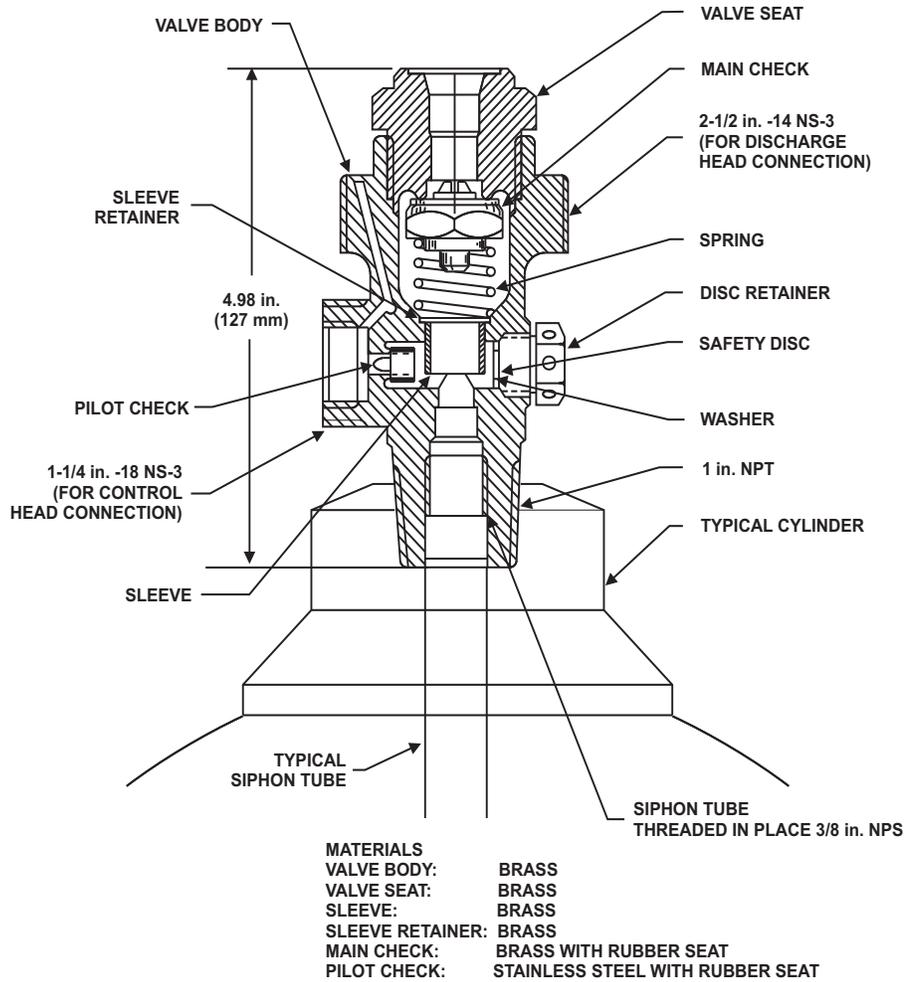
1/2-inch Type "I" Cylinder Valve
